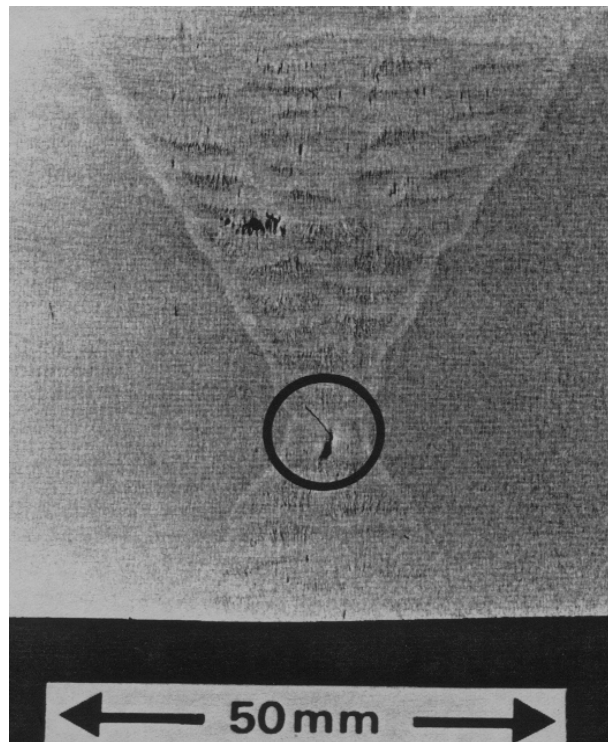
Slice through Crack 7, specimen 5624-19 flaw No.5
